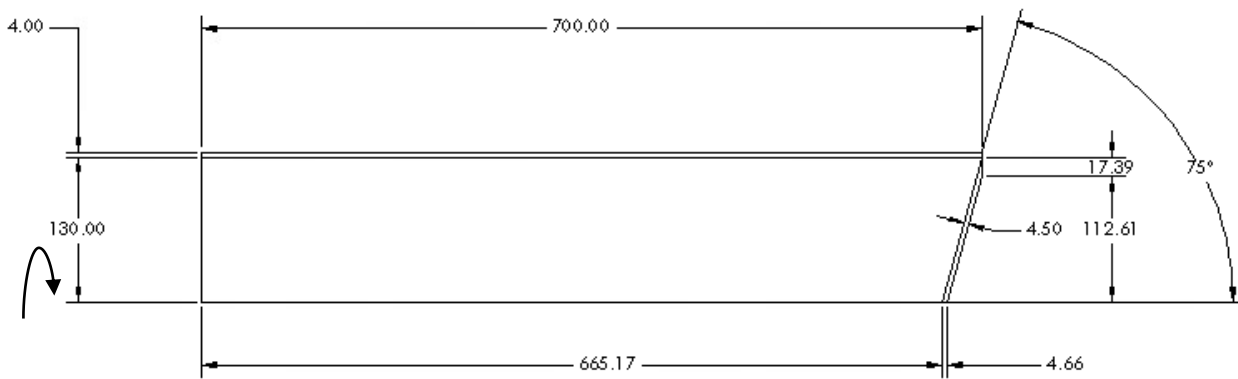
2D Drawing of 59.57 kg TNT Shaped Charge (Dimensions are in mm).
